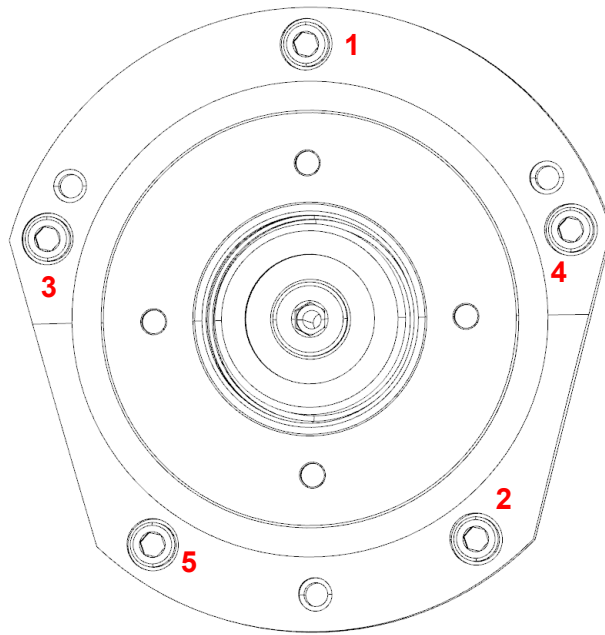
Reform Head Assembly Housing Screw Tightening Order
